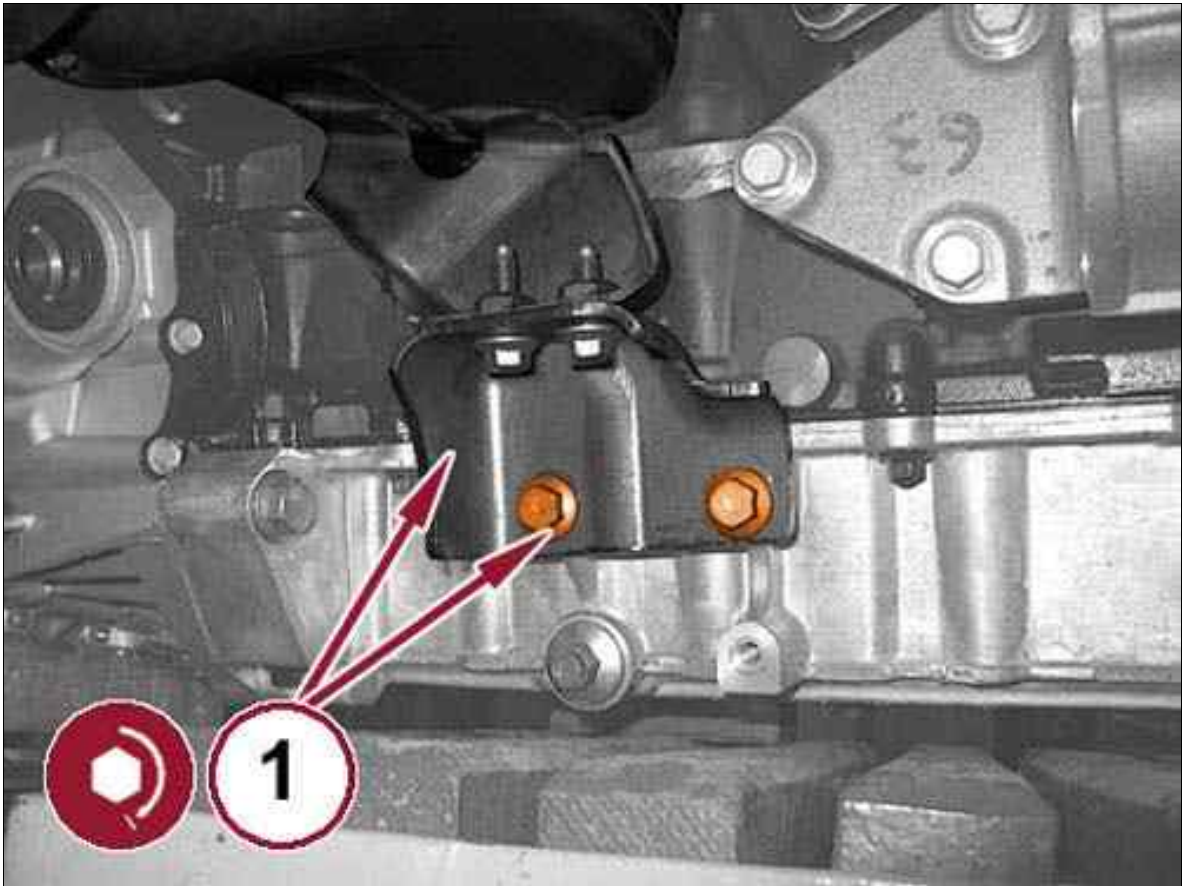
Exhaust Manifold With Catalytic Converter & Nuts
